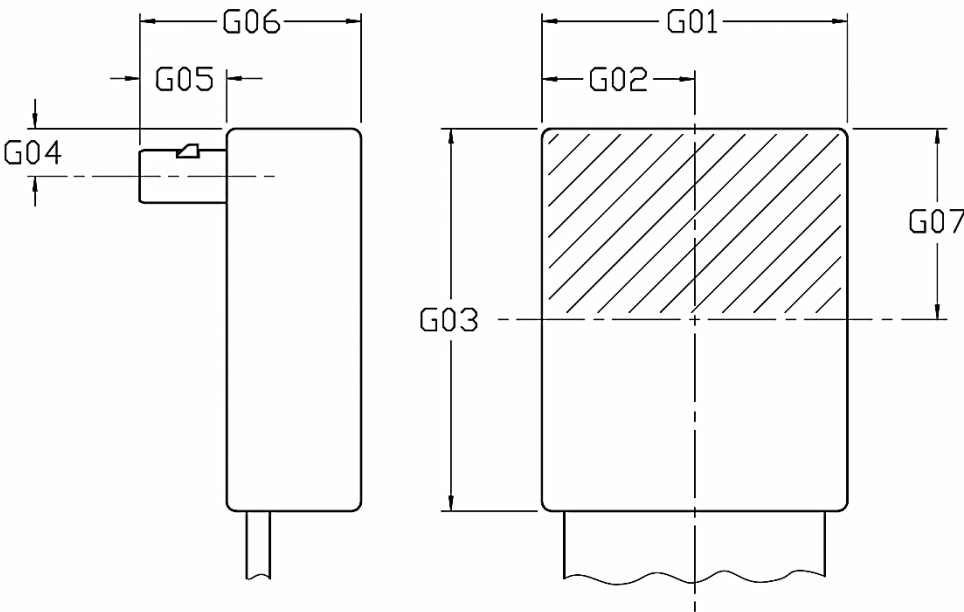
x4 Free Internal Straight-out Cable Exit Form Factor
